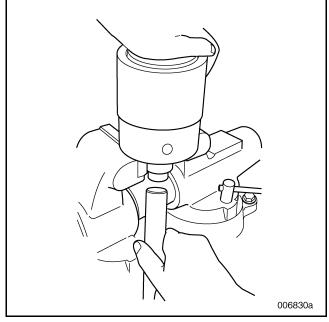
Installing Piston into Range Shift Cylinder Housing
